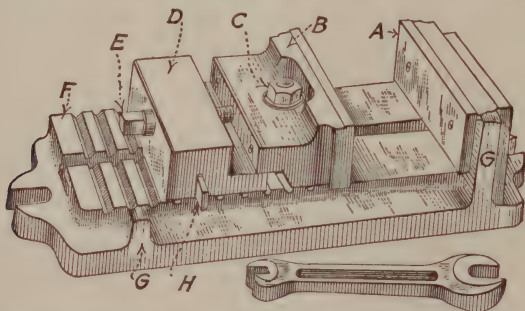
Drill-press vise. (Courtesy of The Skinner Chuck Company.)
